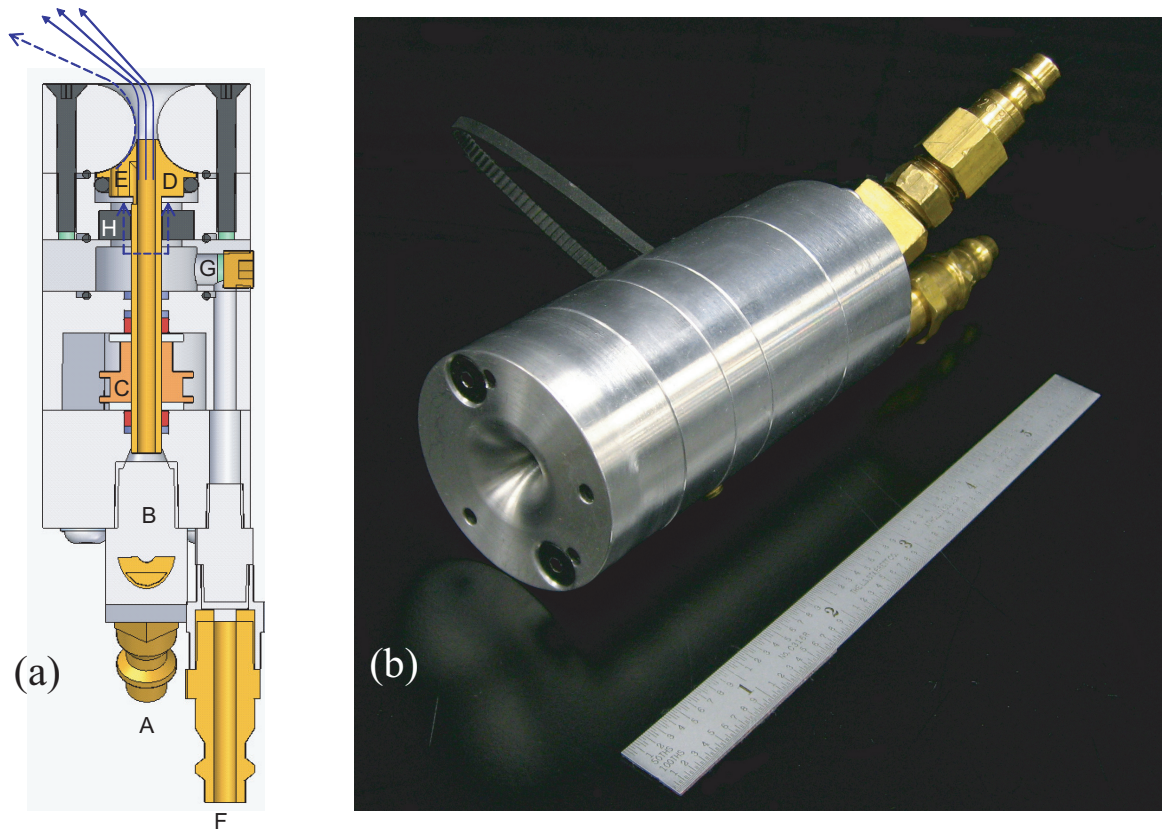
Coanda-Assisted Spray Manipulation demonstration. (a) Scale drawing (b) Assembled device.
